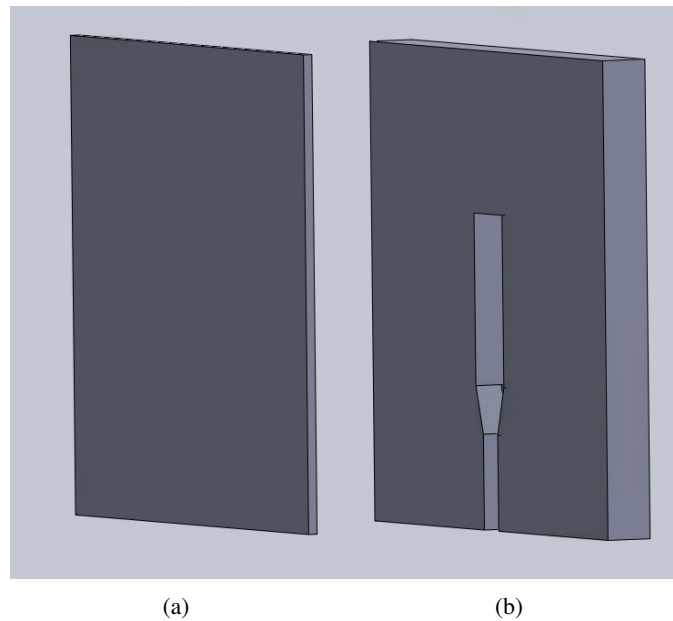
Sample's Solidworks® models for 3DP. (a) Upper part. (b) Lower part.
